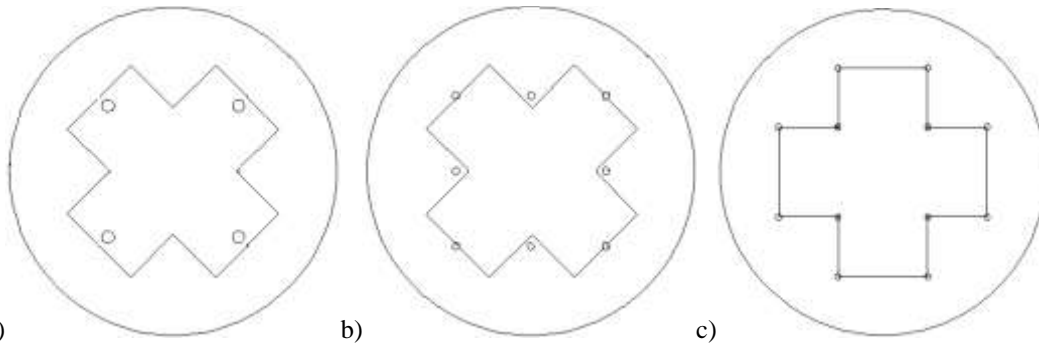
Injector Plate Hole Designs and Fuel Port Outline
